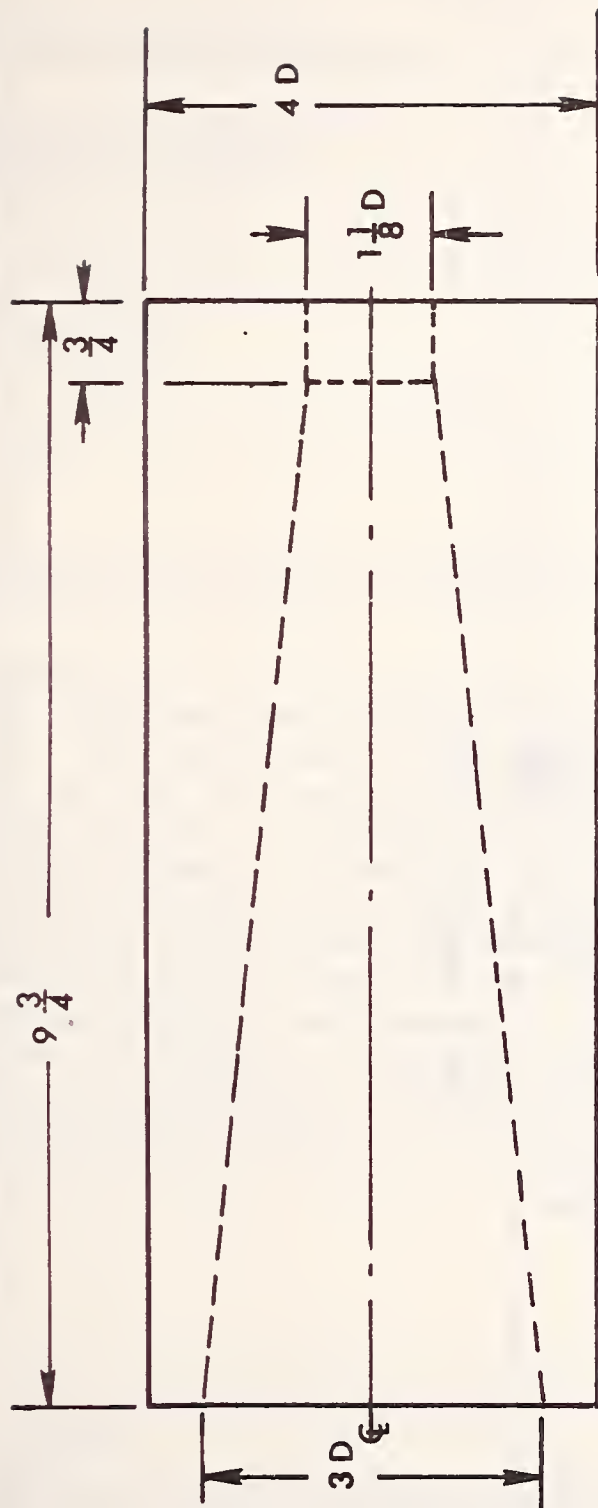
H3M end fitting for 0.79-in (20-mm) diameter rods. Fitting is rotationally symmetric about longitudinal center line. All dimensions in inches (1 in = 25.4 mm).
